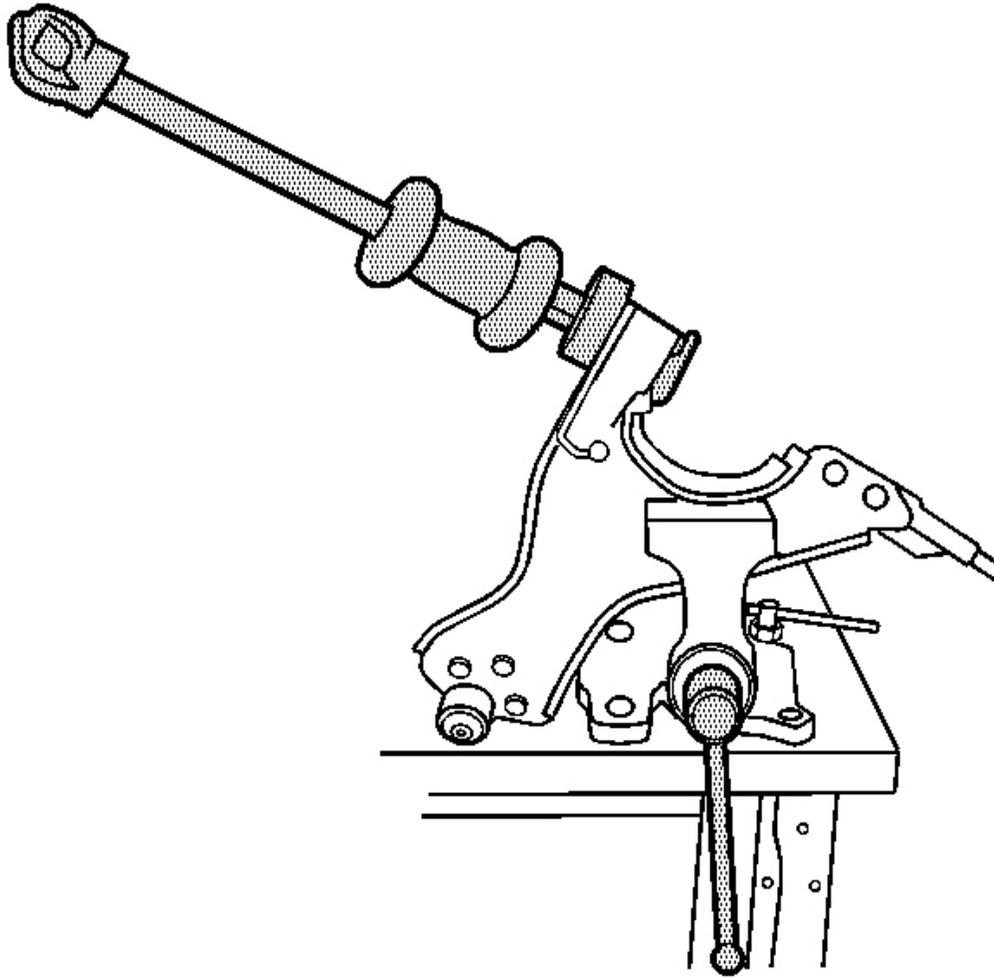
Identifying Special Tools J 2619-01 & CH-48107
